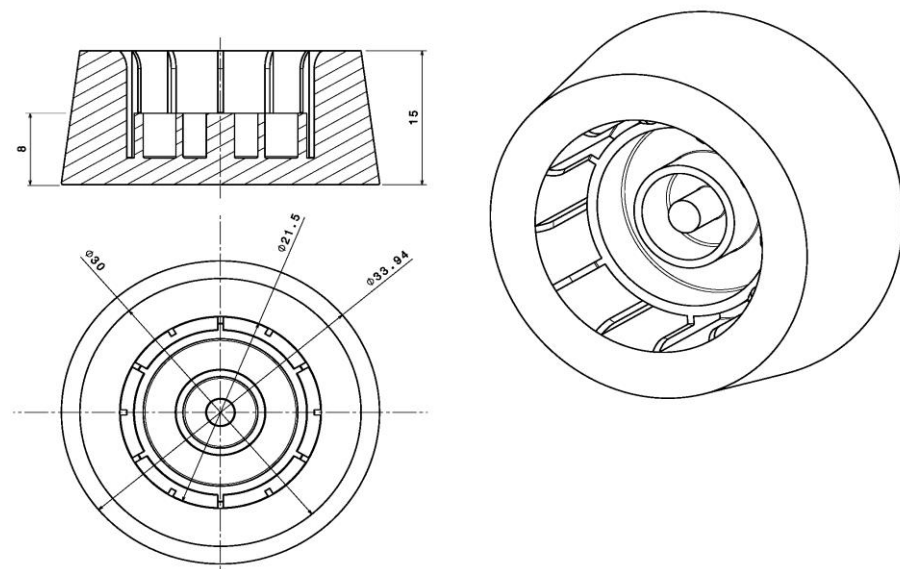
Physical model delimited according to measurements taken from the actual plug used as a specimen to carry out the injection molding tests for the following mixing ratios.
